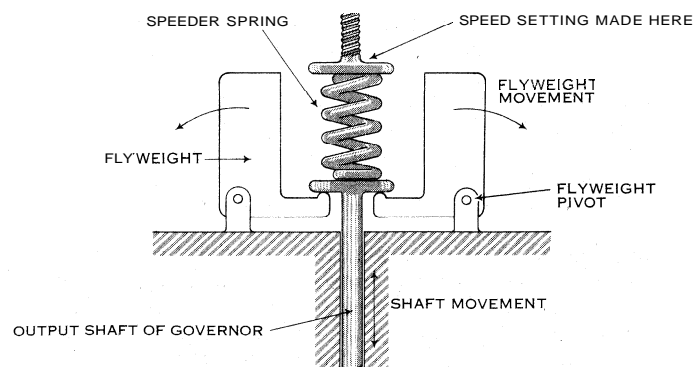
SCHEMATIC DRAWING OF SIMPLE MECHANICAL GOVERNOR
